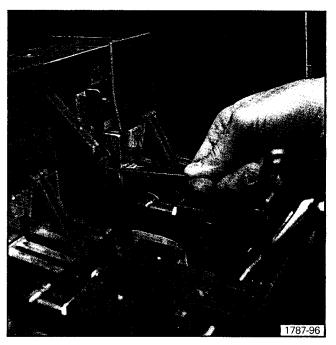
Check of Main Contact Make (Compression) Using GO/NO-GO Gauge
